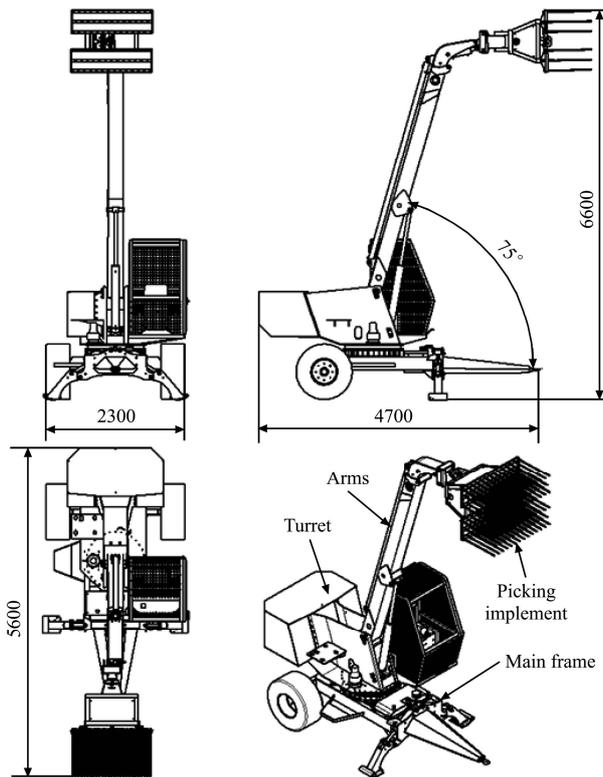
Views of the complete machine with the functional groups (dimensions in mm)
